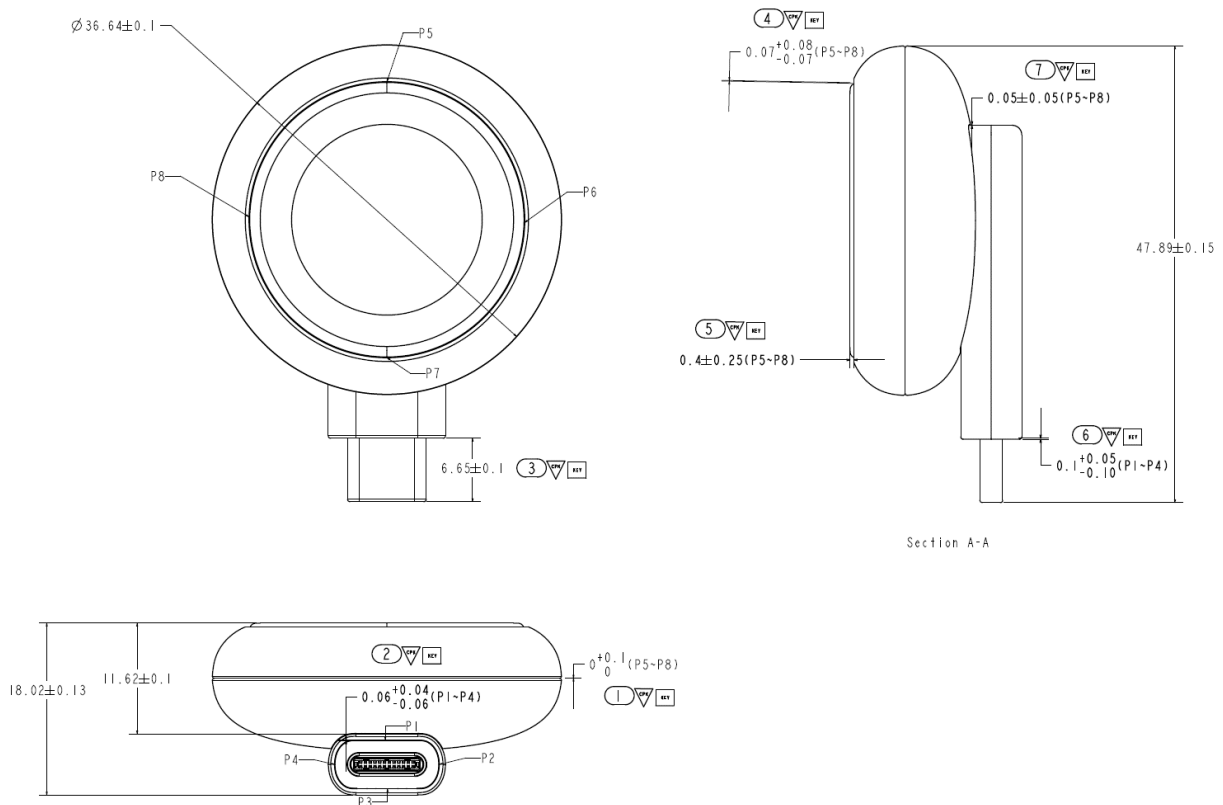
EUT Mechanical Dimensions and Tolerances
